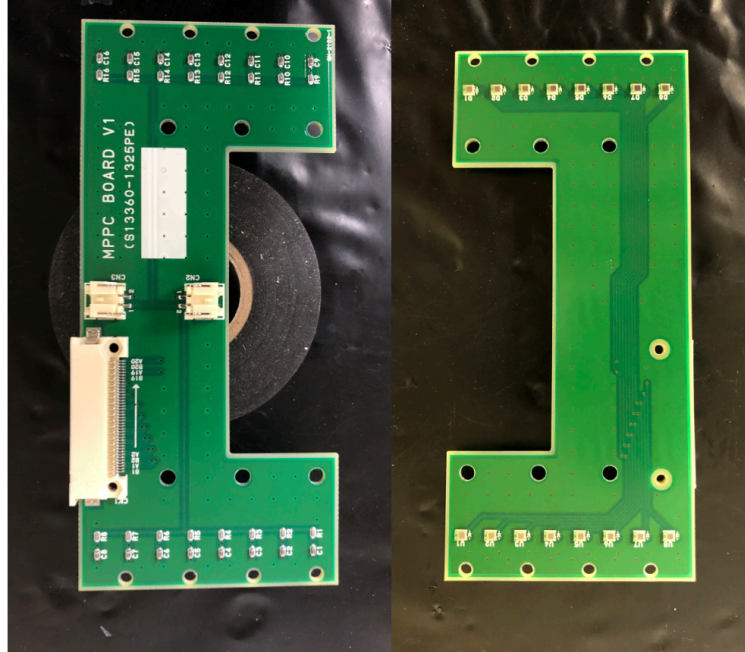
MPPC readout board for the prototype. It is made of a two-layered circuit, with layer 1 (front side), L1, used for mounting components of cable connectors as well as capacitors and resistors and for mounting HV lines and layer 2 (back side), L2, used for mounting SiPM and the signal lines.
